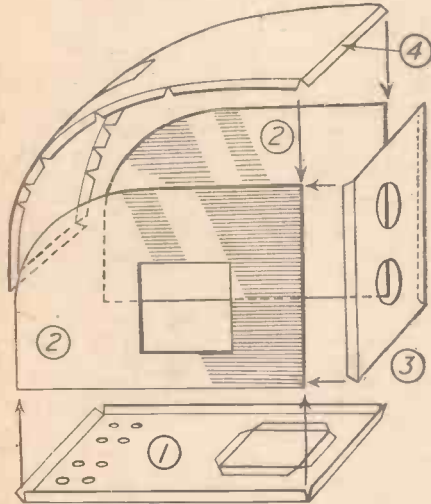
Part sectional view of the lantern-house. The number of each component part is given for easy reference, and relates to the numbered drawings.
